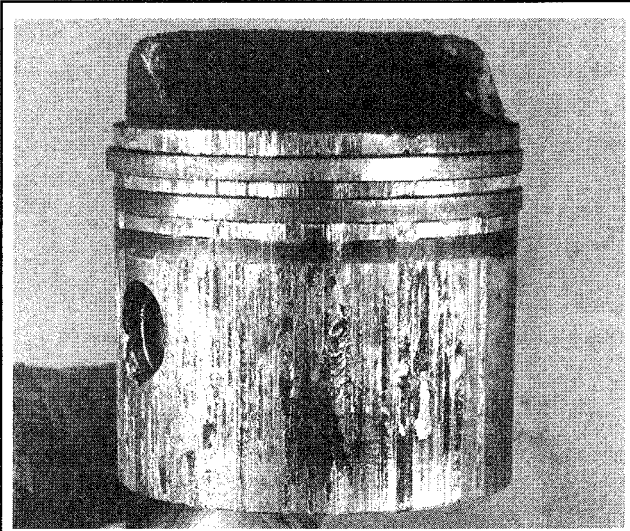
Damaged piston, possibly caused by; using too-low an octane fuel; using fuel that had "soured" or by insufficient oil
